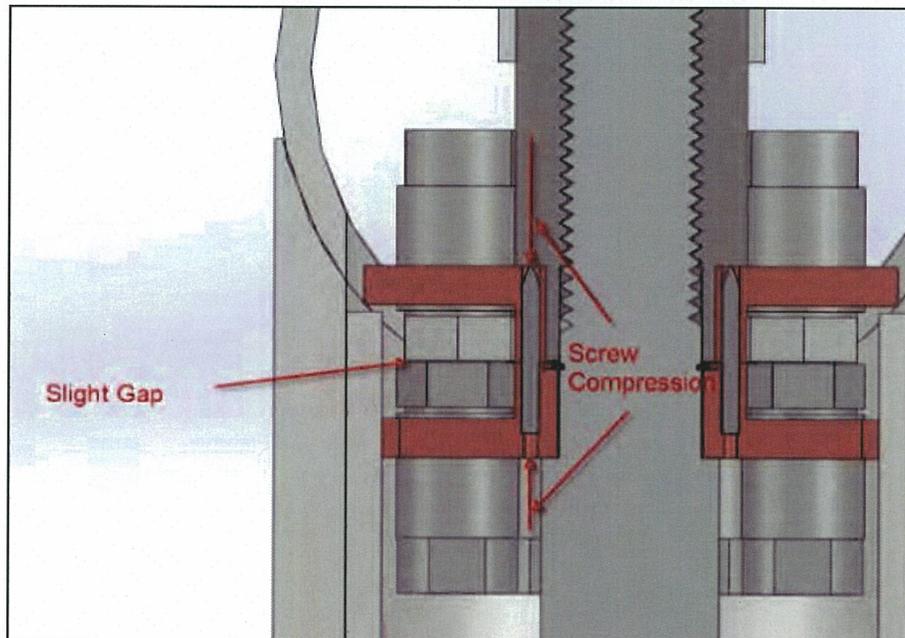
View Showing Fully Engaged and Torqued Utility Plates
